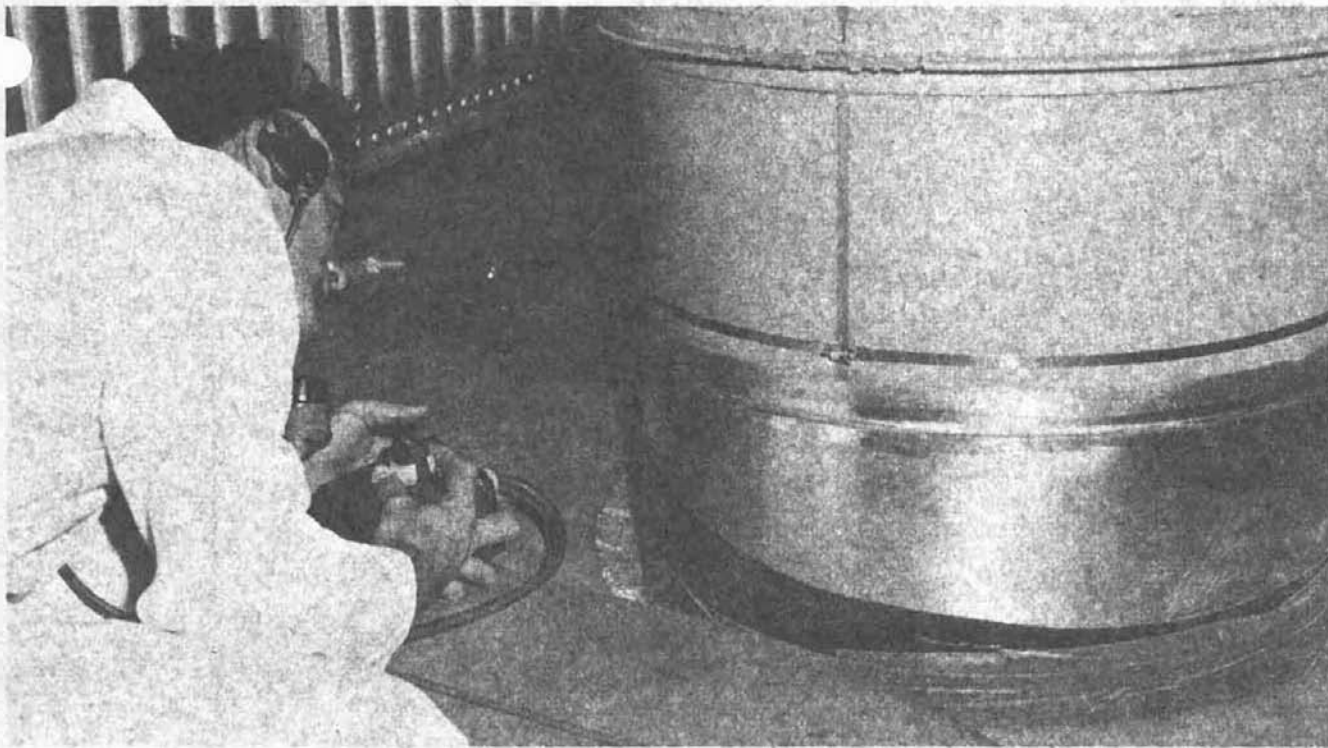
THE WELDER IS SHOWN CONTROLLING WELD PENETRATION BY USE OF A REMOTE AMPERAGE POTENTIOMETER FROM INSIDE THE FUEL TANK
